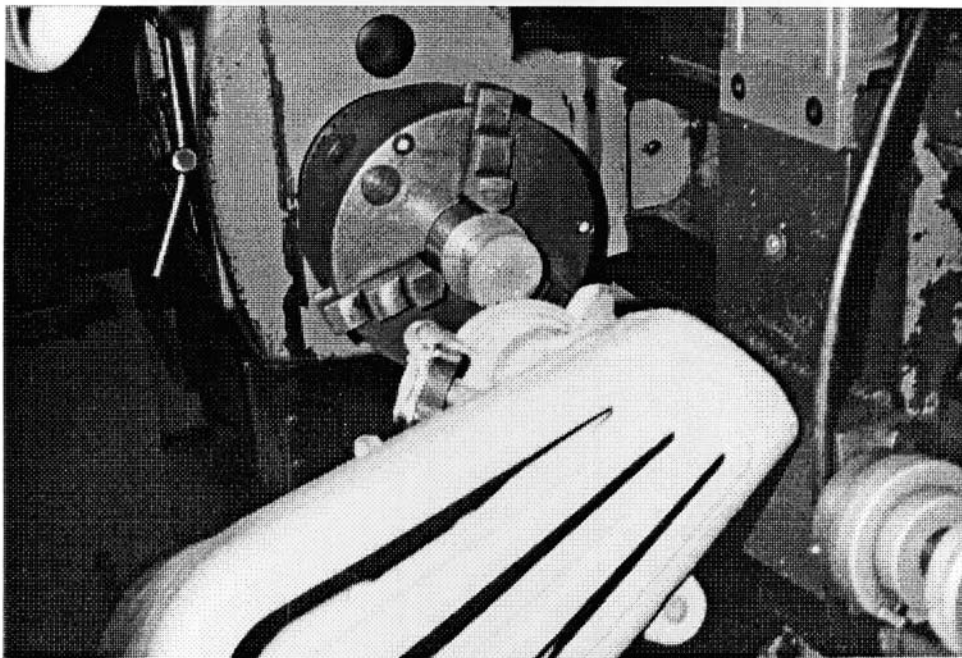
Specimen Located in Lathe Ready for Grinding.
